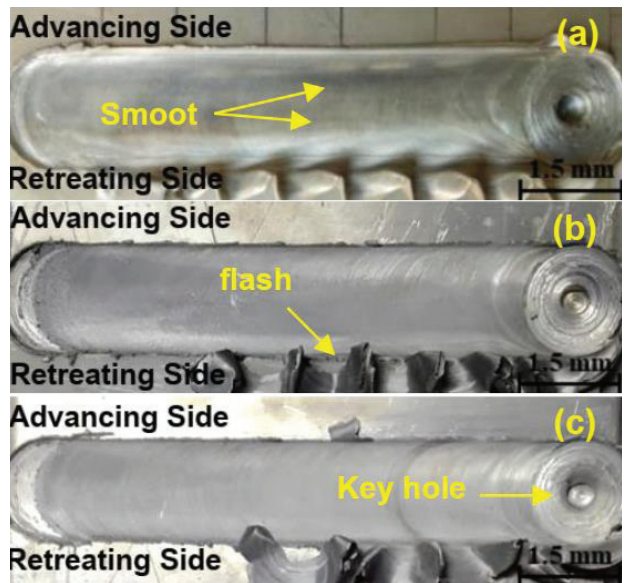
Characteristics of welding from top view surface using a cylindrical tool pin at rotation speed 2000 rpm and welding speed: (a) 80, (b) 112 and (c) 160 mm/min
